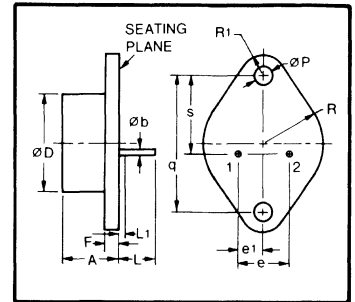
DIMENSIONAL OUTLINE JEDEC TO-204MA (Formerly JEDEC TO-3)
